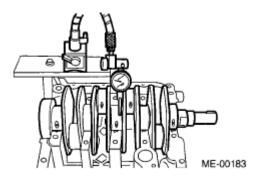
Measuring Crankshaft Bend Using Dial Gauge Courtesy of SUBARU OF AMERICA, INC.
